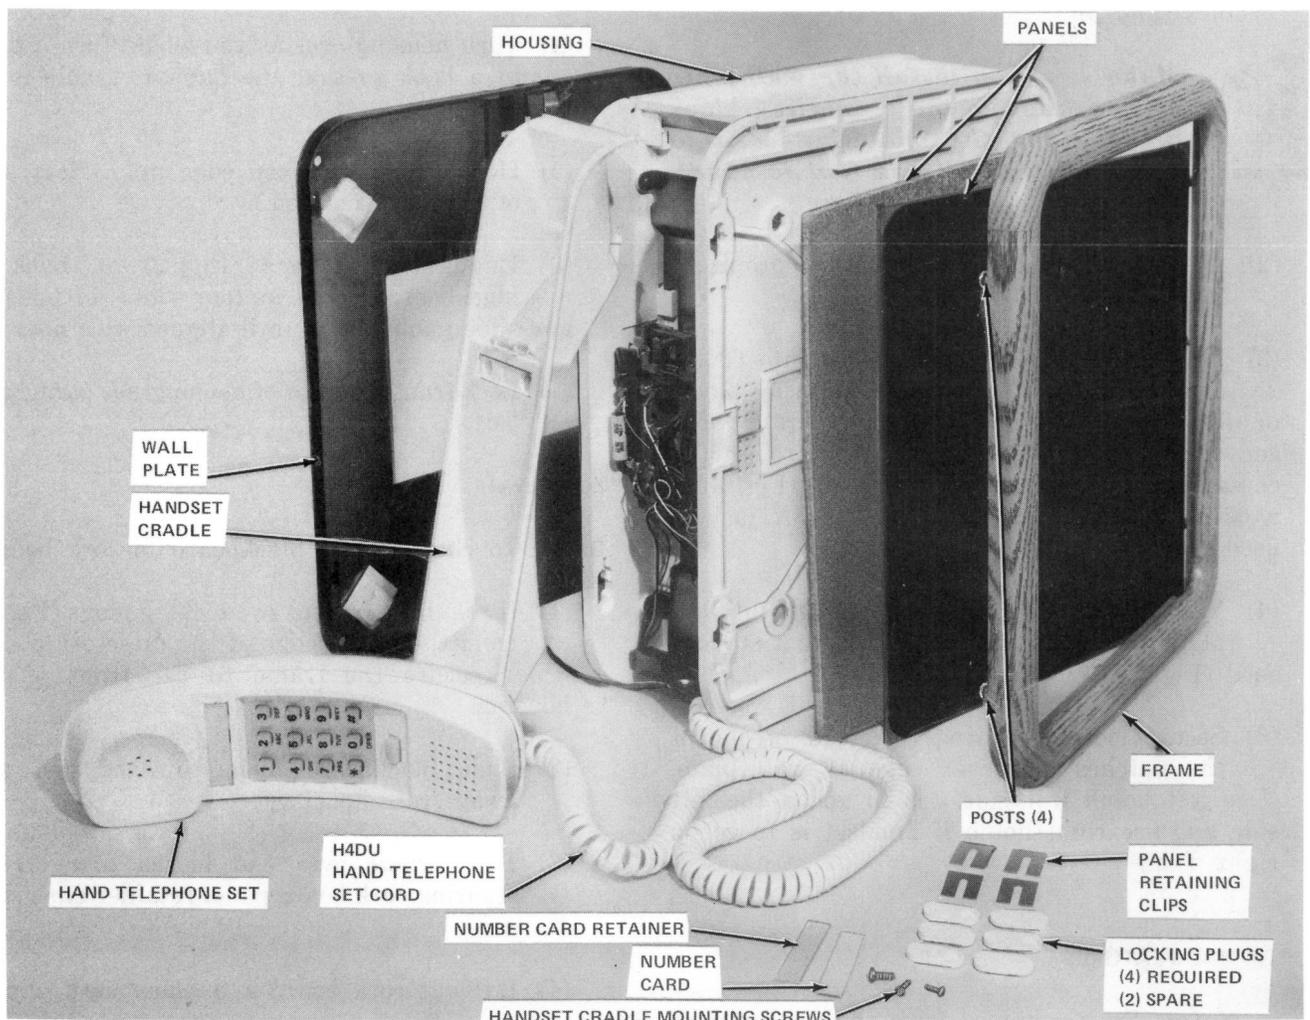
950A- or 2950A-Type Telephone Set, Assembly
